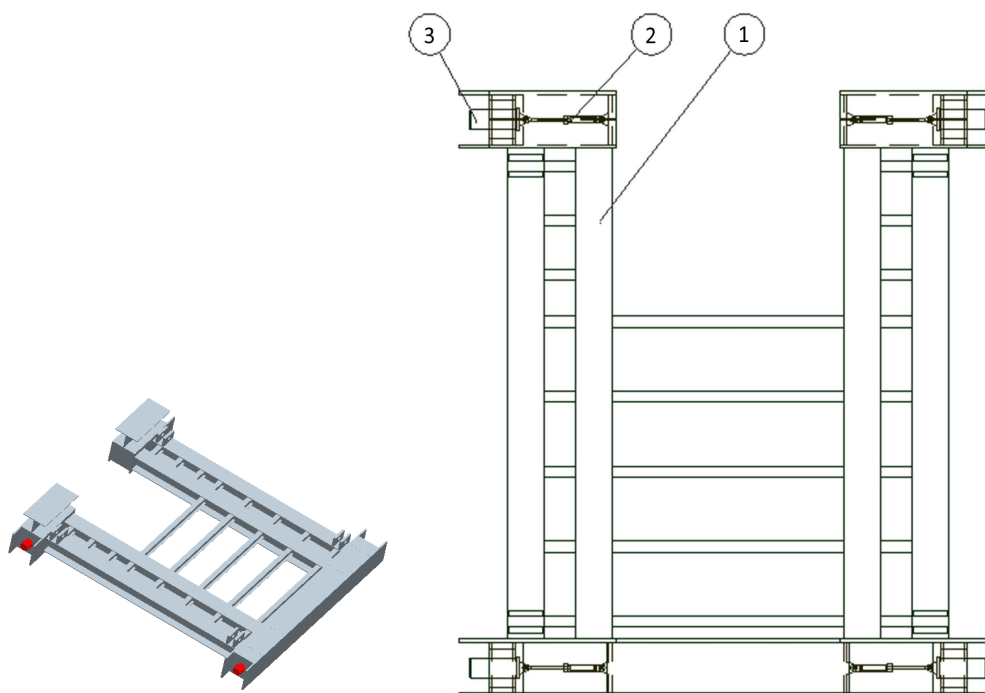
Outline drawing of the lower ring beam assembly; ① Lower ring beam; ② Latch cylinder; ③ Latch
